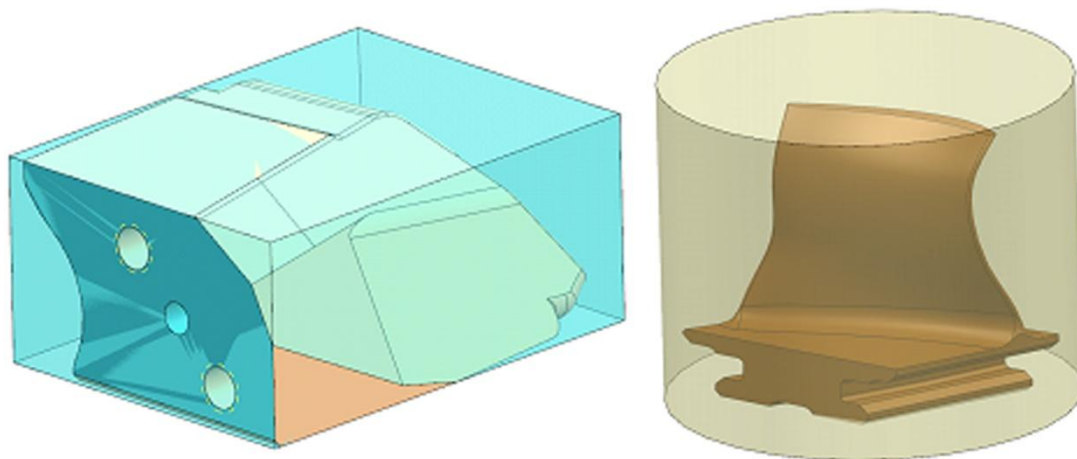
Examples of blanks "Insert" and "The Level 7 blade"
